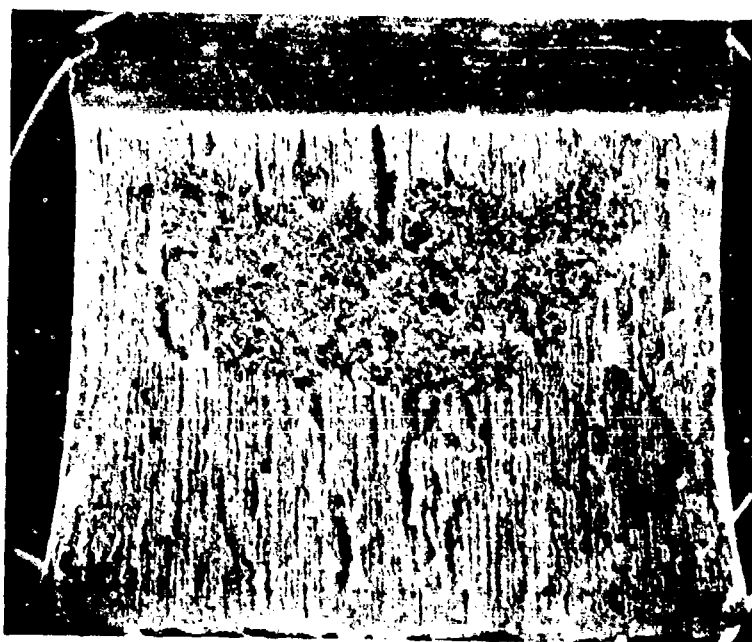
Fracture surface of A-588 Charpy specimen tested at 23°C, 8x.
